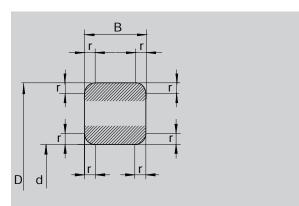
Radial Bearings(Except tapered roller bearings)
